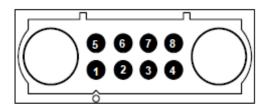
M80-5000822 Top view This is the PCB mounted connector on the driver
